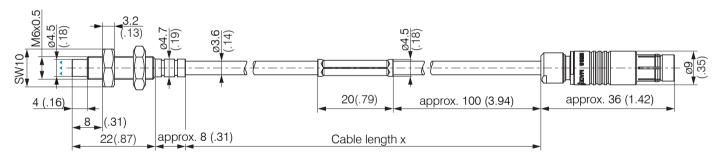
Dimensional drawing sensors ES-U1-C-CAx/mB0, dimensions in mm (inches)
